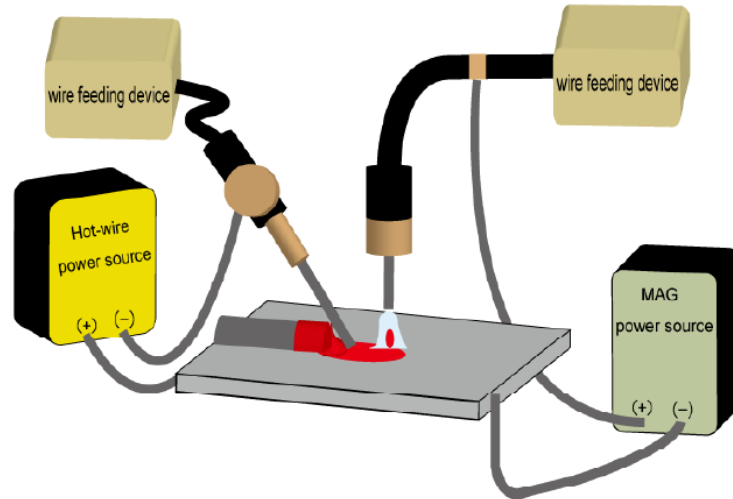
System of hot-wire MAG welding method [33].
